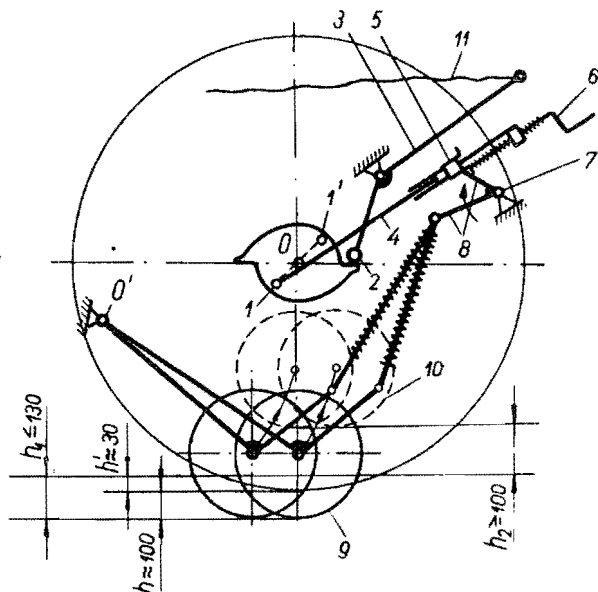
Example of an automatic mechanism for lifting and lowering disk openers in tractor-trailed drills: 1—crank journal; 2—roller; 3—two-armed roller lever; 4—connecting rod; 5—slotted lever block; 6—crank for adjusting the slotted lever block (to control the idle motion of the connecting rod); 7—square shaft; 8—lever arms; 9—openers in working position; 10—openers in transport position; 11—cable engaging the lifting system.
